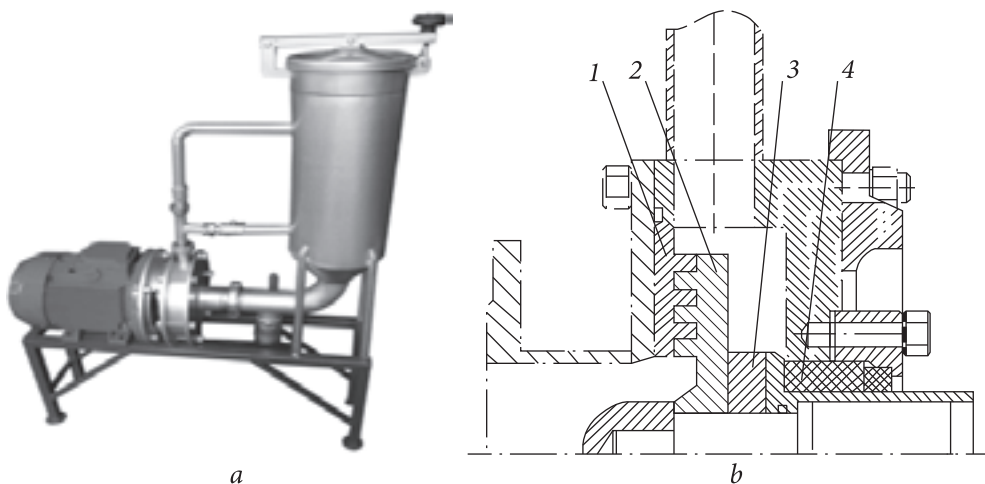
Rotary hydrodynamic unit-homogenizer: *a* — photo; *b* — drawing of the flowing part [61]: 1 — stator; 2 — rotor; 3 — washer adjusting gap between the stator and rotor disks; 4 — end seal
